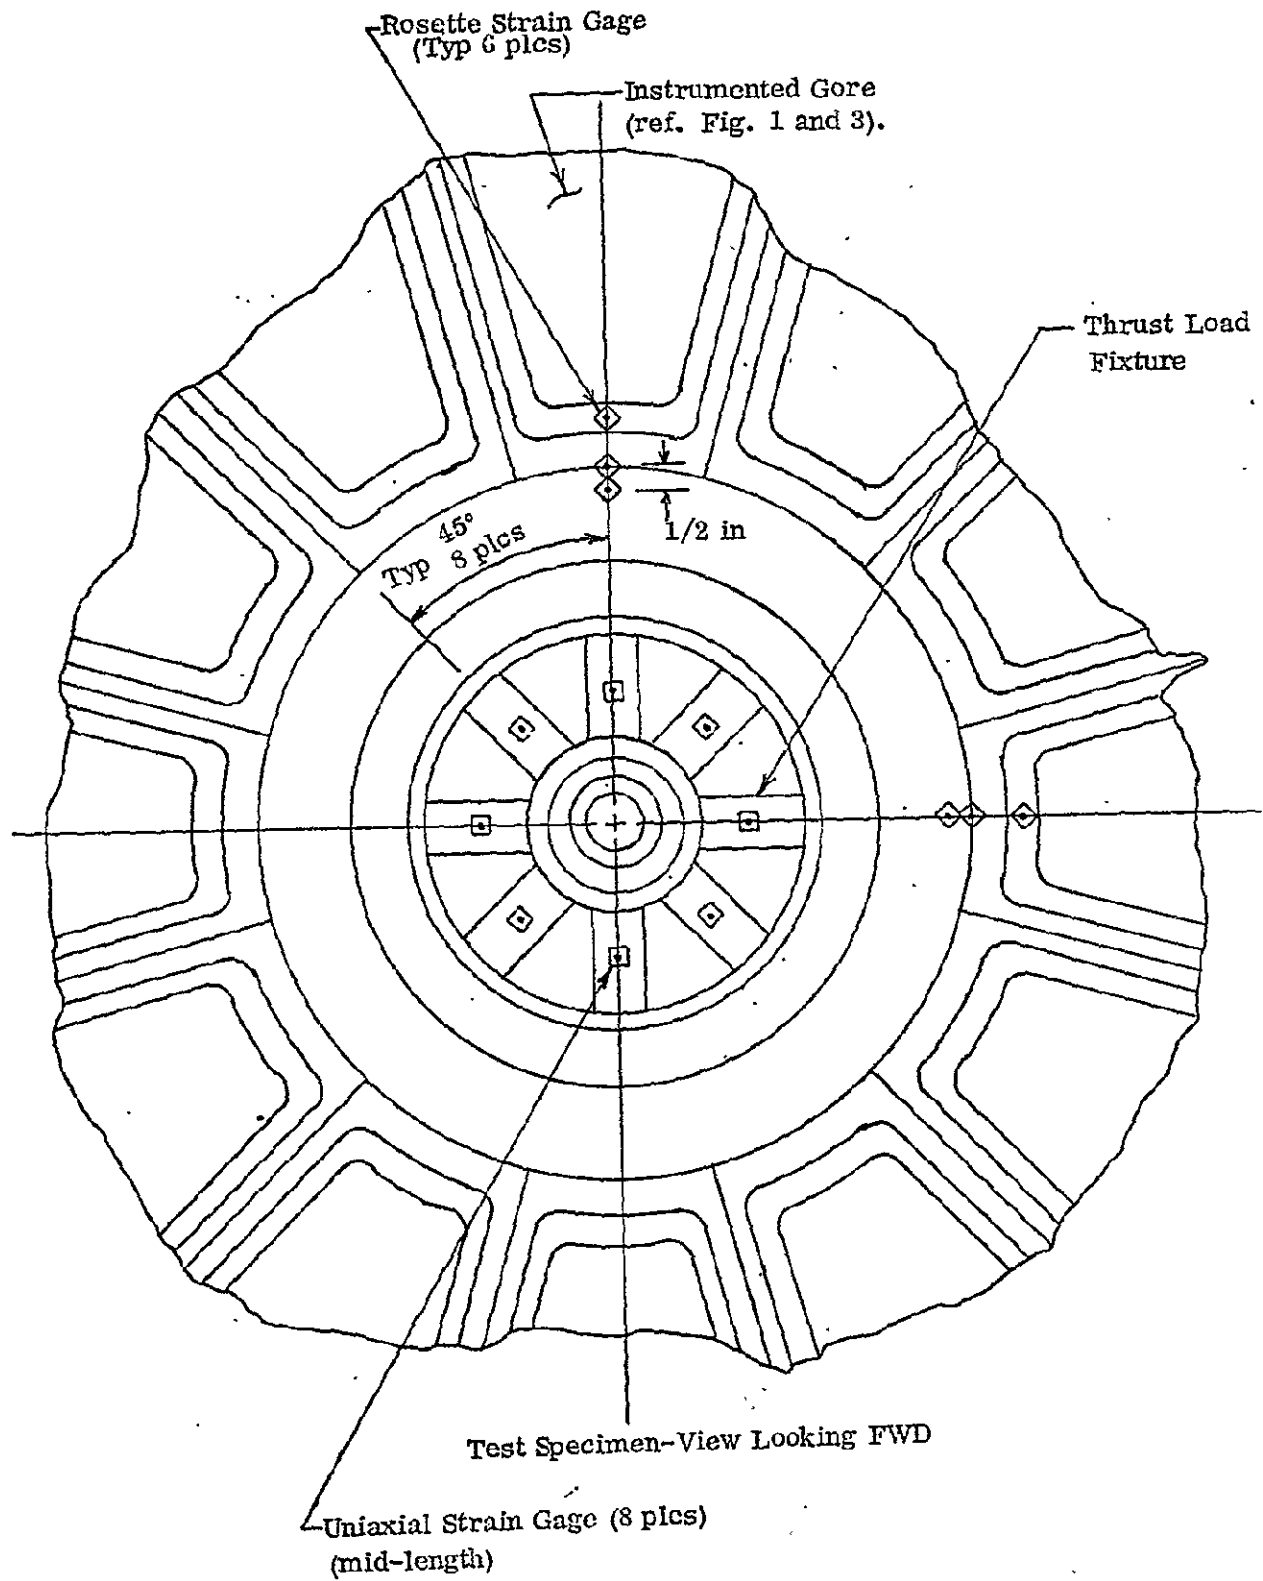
Strain Gage Locations — Tank Door and Thrust Load Fixture
